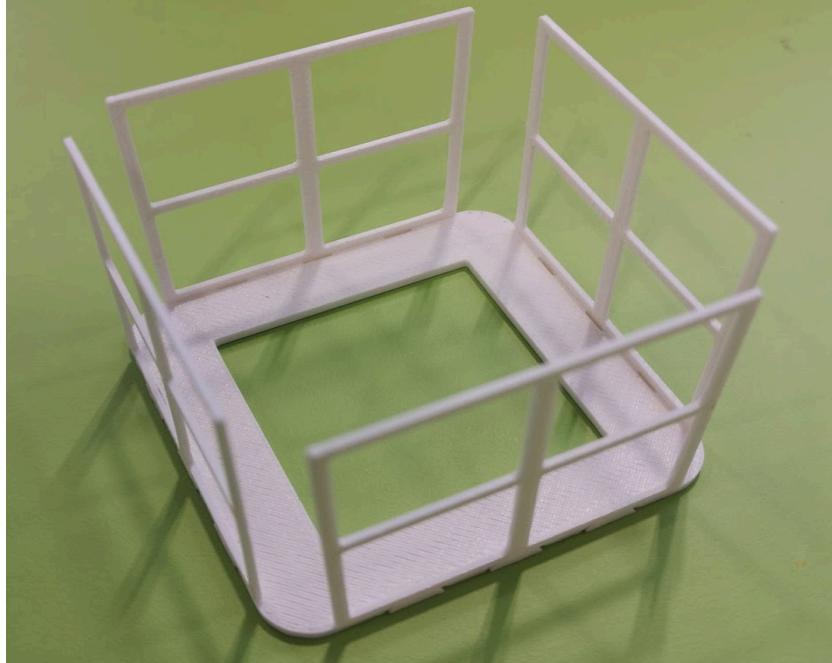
Photograph of finished 3D printed, PA12 spacer. The four sides have been clipped into the base using 3 friction fit dovetail joints on each side of the base.
